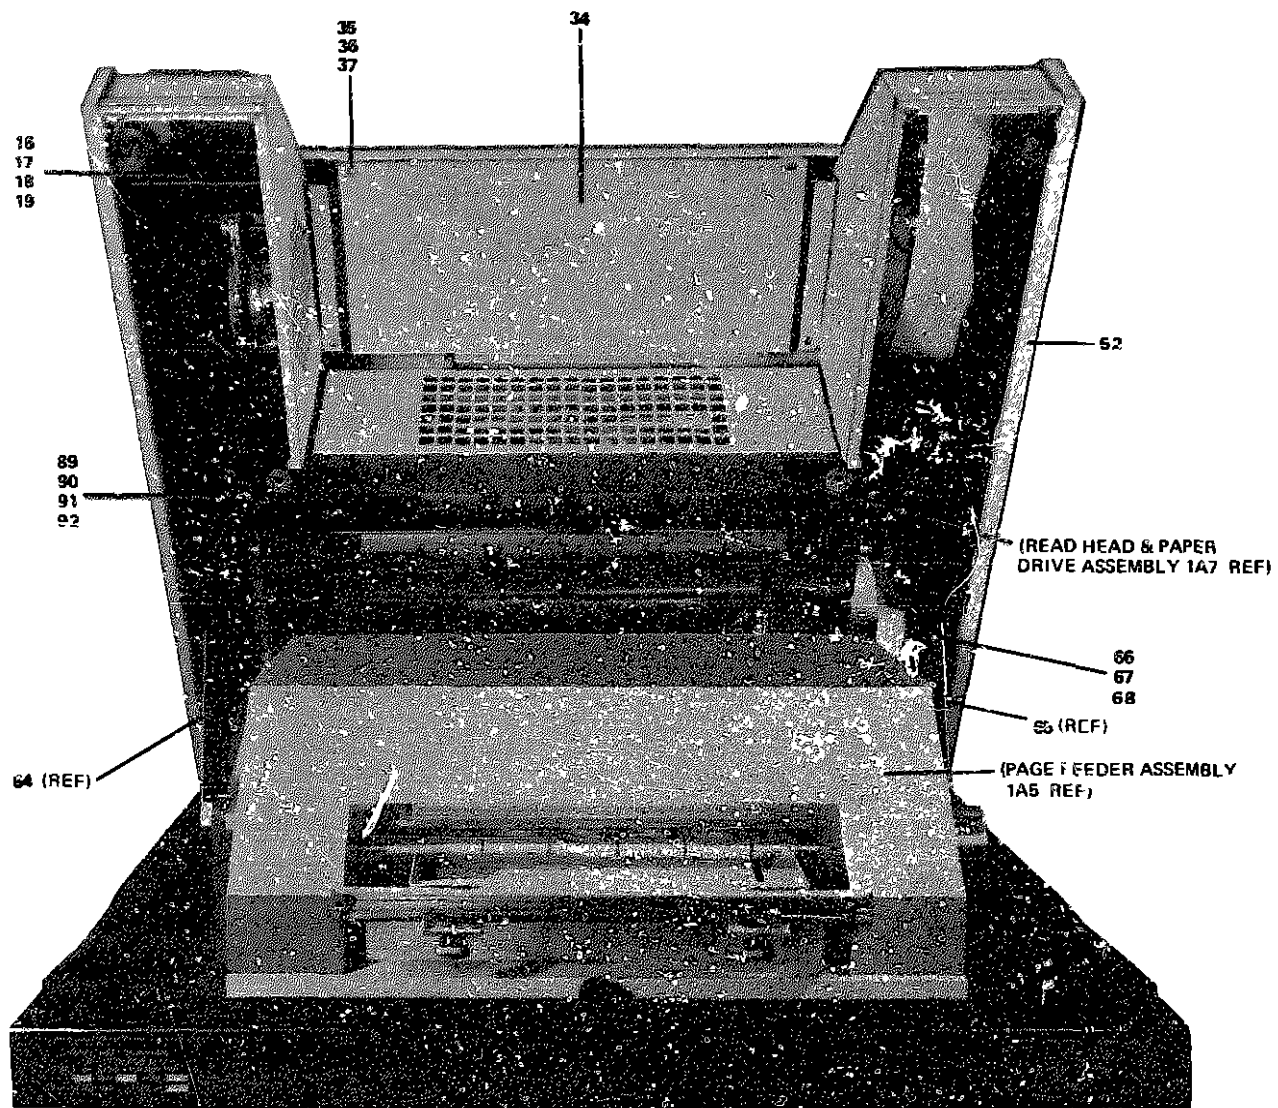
CONTROL CONSOLE ASSEMBLY 1A6 (SHEET 4 OF 6)
